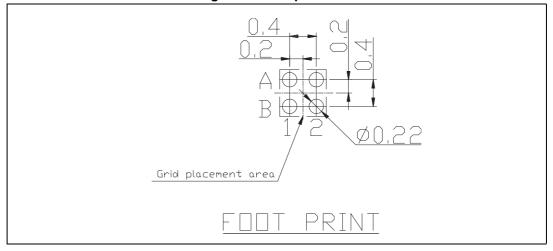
Flip-chip 4 package drawing (dimensions are in mm.)
